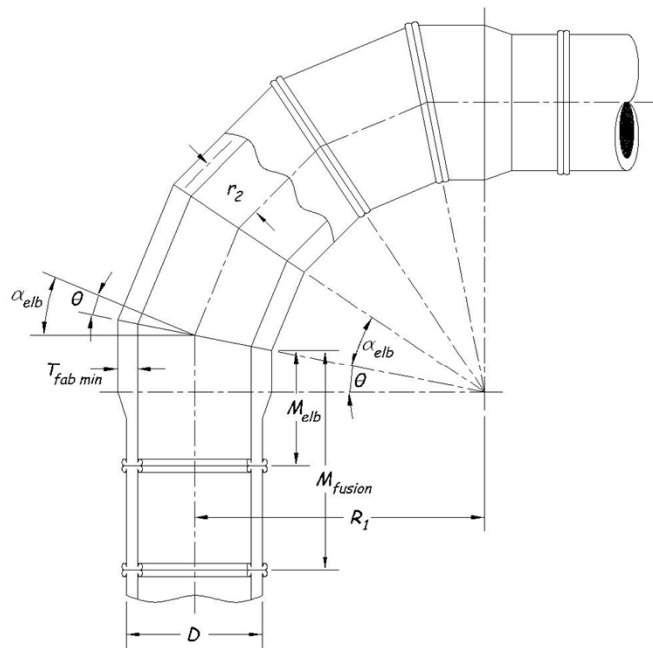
Nomenclature for Constant ID, 5-Segment, Reinforced, 90 Degree Elbow
